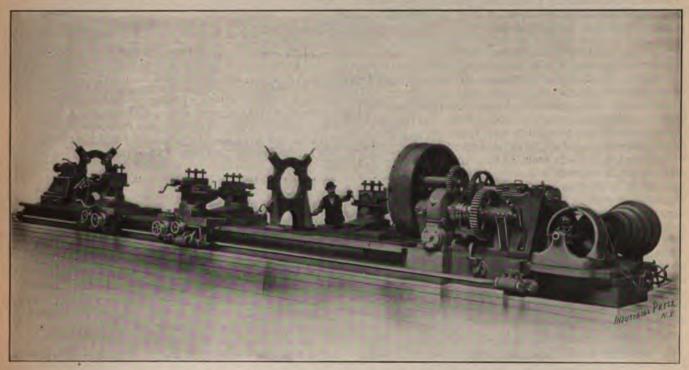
Sixty-three Inch Niles Lathe with Four Carriages, Driven with 15 H. P. Motor,
